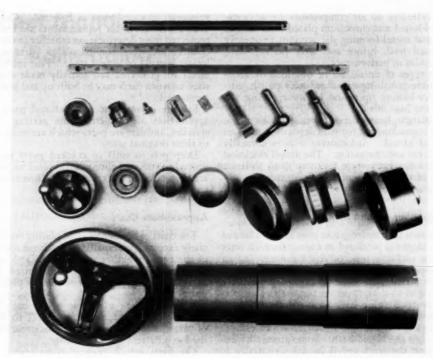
Plated parts of jig borer include iron, several grades of steel, aluminum, and brass
